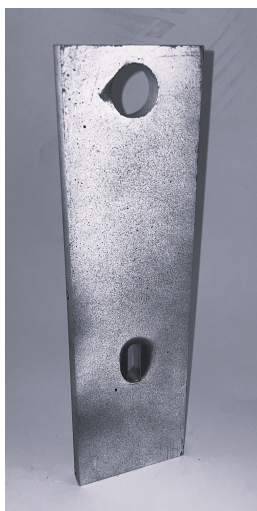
Steel plates machined for varying screw inclinations.
